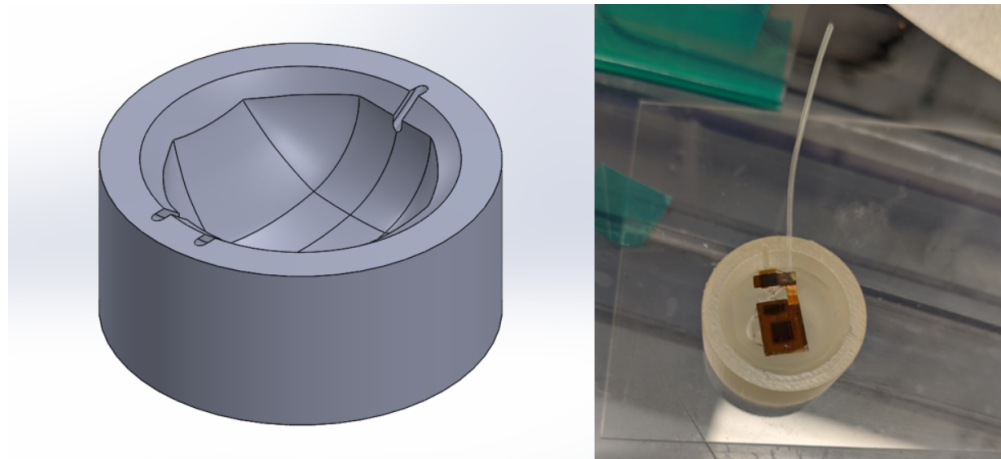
Mold to cast the final form factor. Notches are spaces for the tube to come out. A stainless steel ball goes on top to shape the inner side of the implant.
